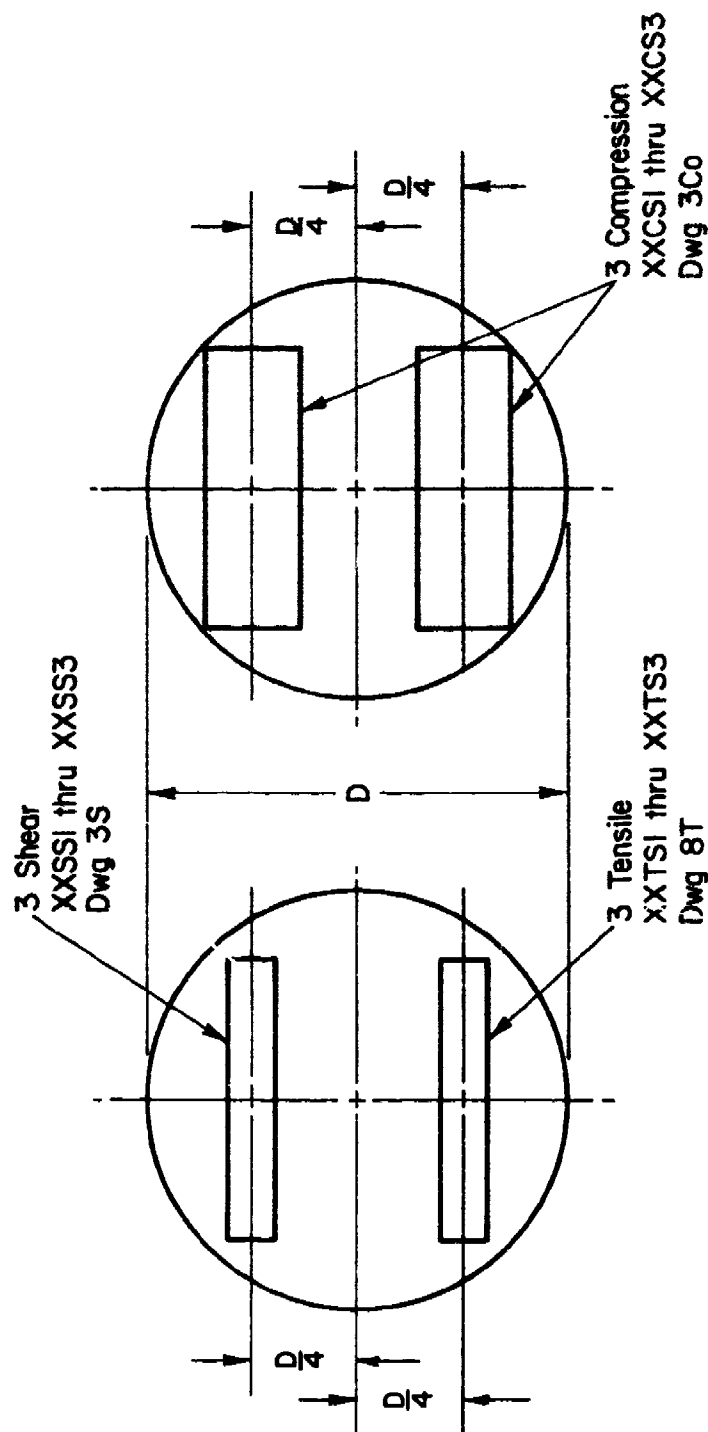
Location of short transverse tensile, compression, and shear specimens for Inconel 625 and Inconel 718 bar--2-1/4-inch diameter.
